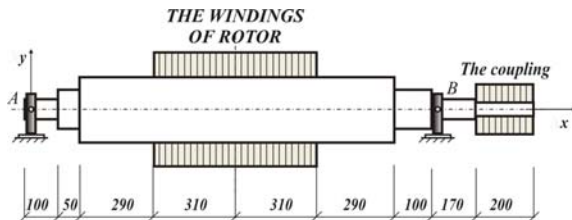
The shaft is modeled using 9 beam elements. The windings of rotor and coupling are presented as the distributed uniform loading
